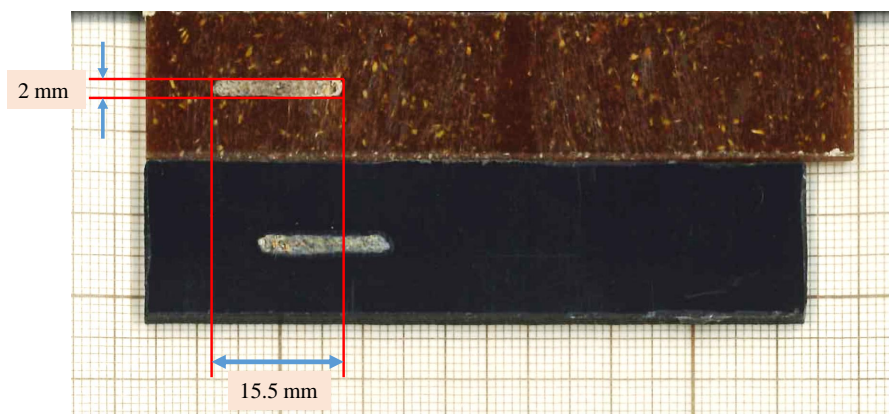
Dimensions of weld line at weld interface. Weld line produced at laser speed of 2mm/s.
